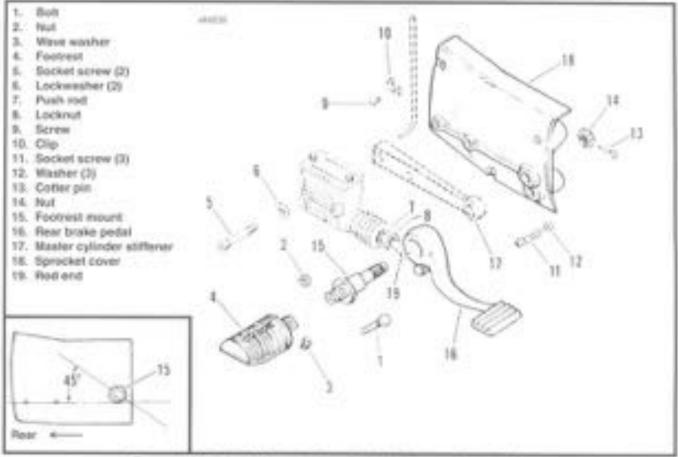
Footnest Mounting, Rear Brake Linkage and Sprocket Cover.
